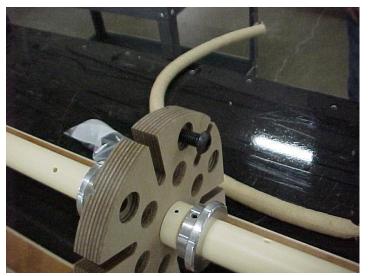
Hex Head Cap Screw being inserted into a non-molded deck.
